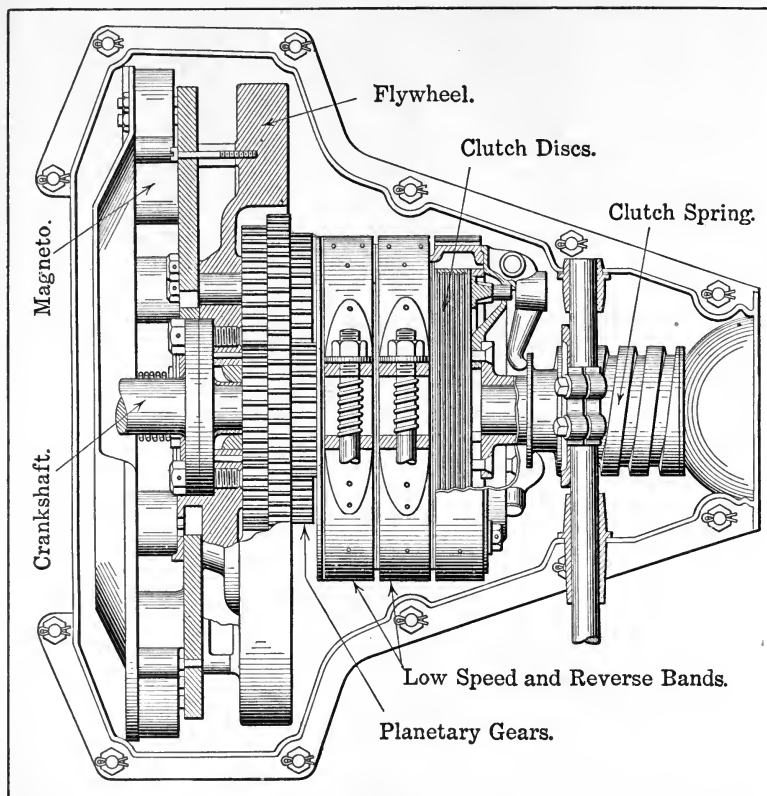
Two-Speed and Reverse Planetary Gear Employed on Ford Automobiles.
